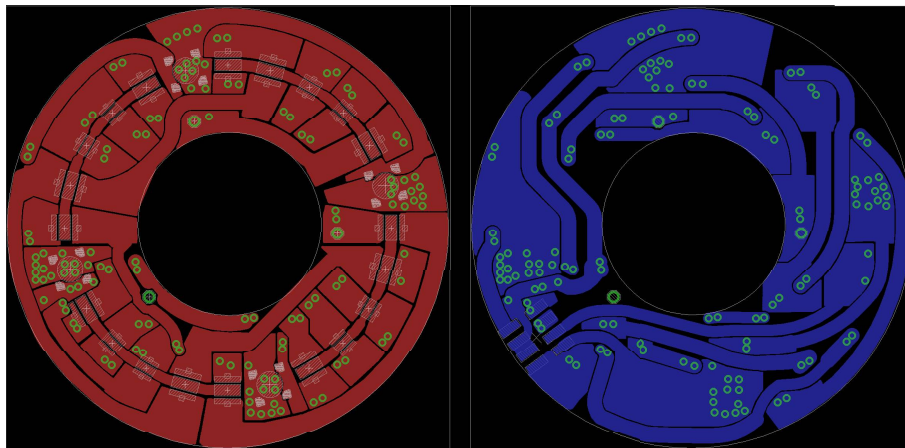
LED ring drawing: component side (left) and drawing the other side (right)
